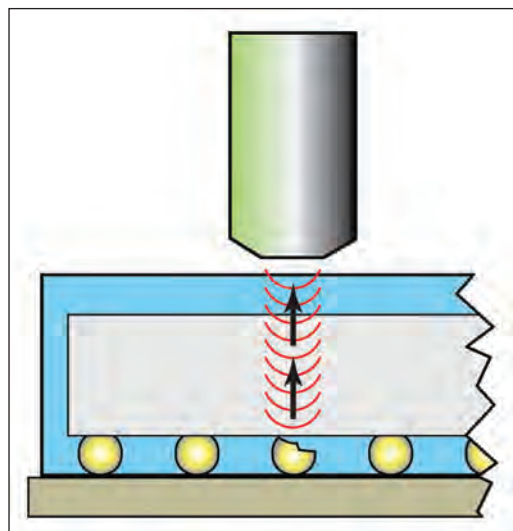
Ultrasound (red) pulsed into a molded underfill flip chip must travel through the attenuating underfill (blue) to image the solder bumps
